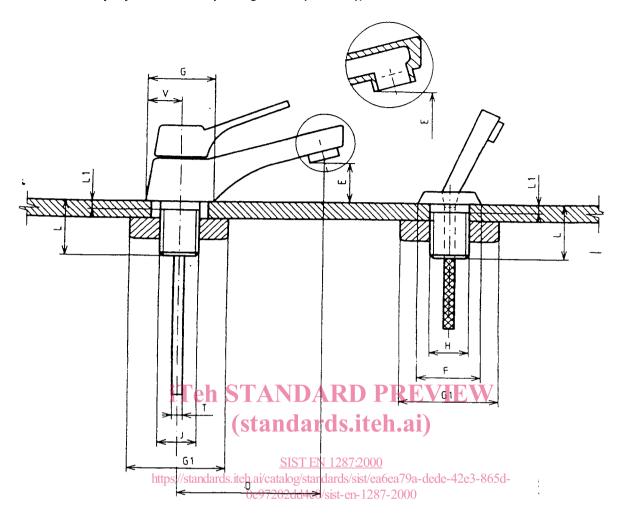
Single hole thermostatic mixing valve with remote spray attachment
